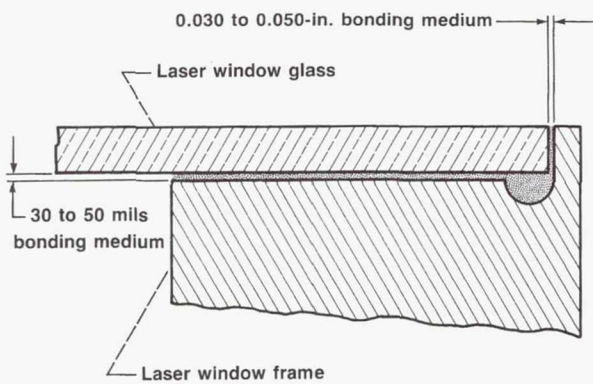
Cross section of laser window frame, glass, and bonding medium.
